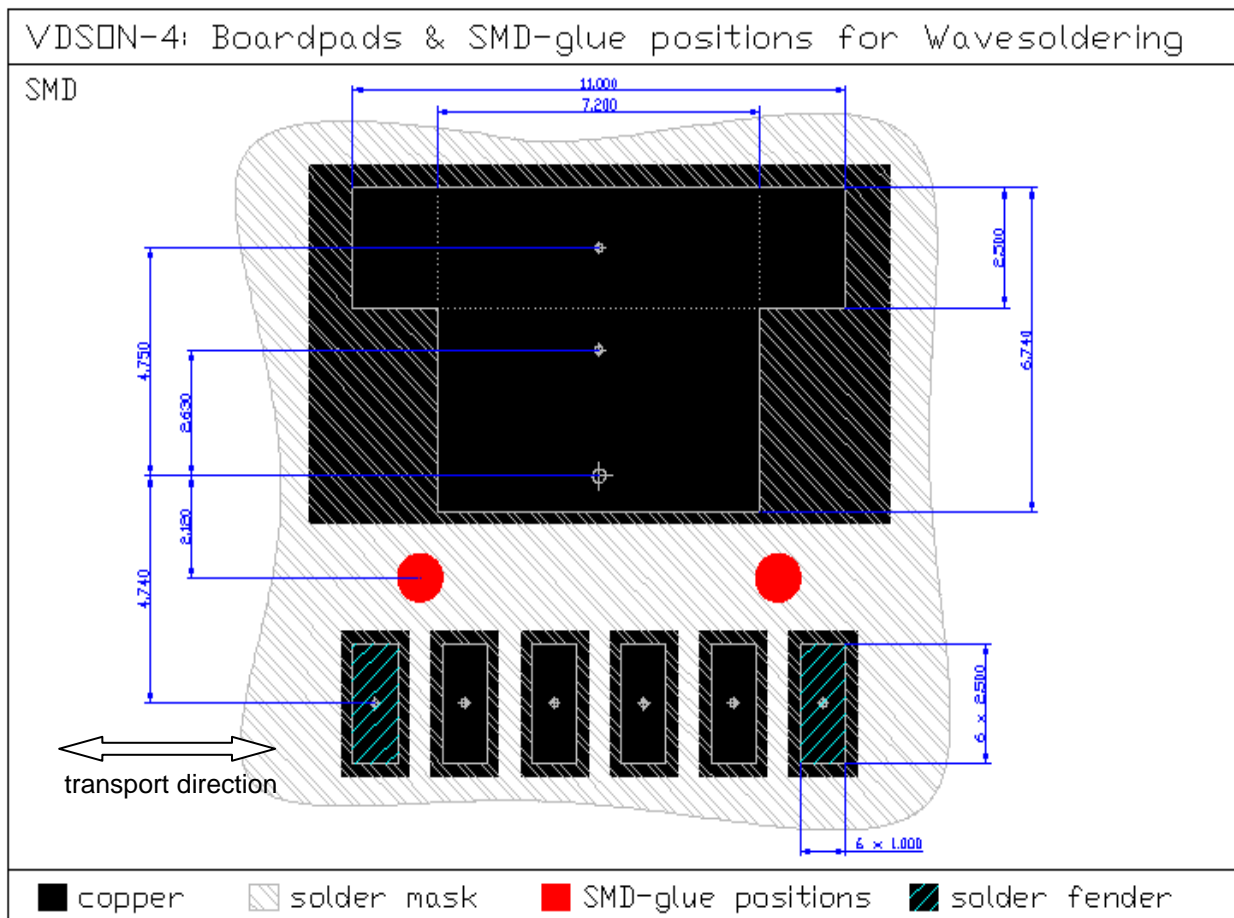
PCB pad design for wave soldering of VDSO4-4 with SMD-glue positions and solder fender
